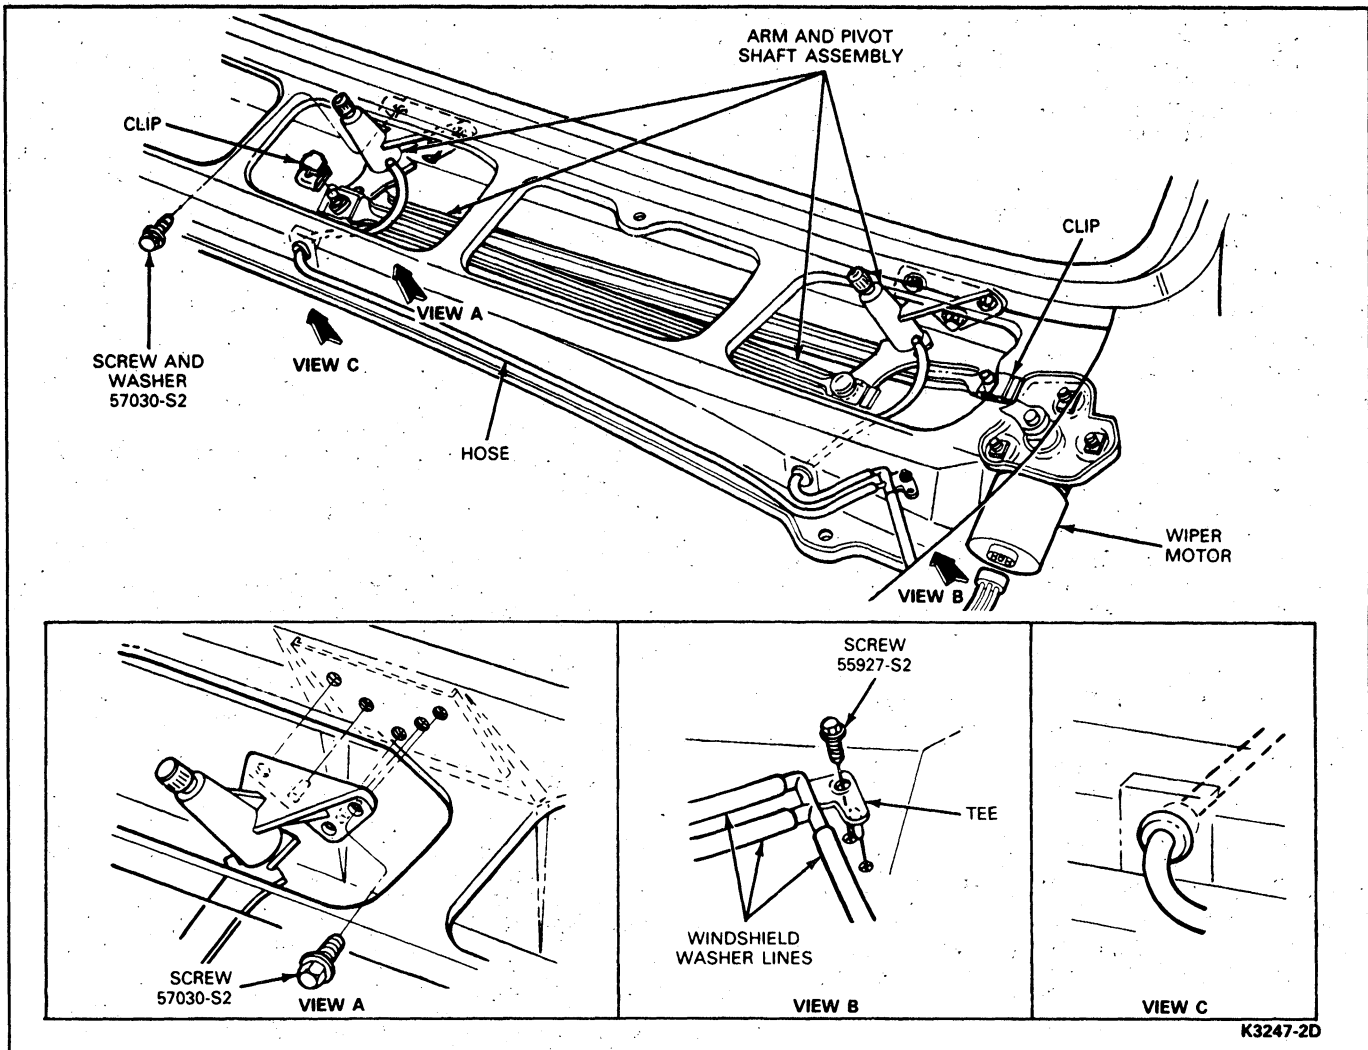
Windshield Wiper Motor, Linkage, and Pivot Shaft Installation—E-150—E-350
